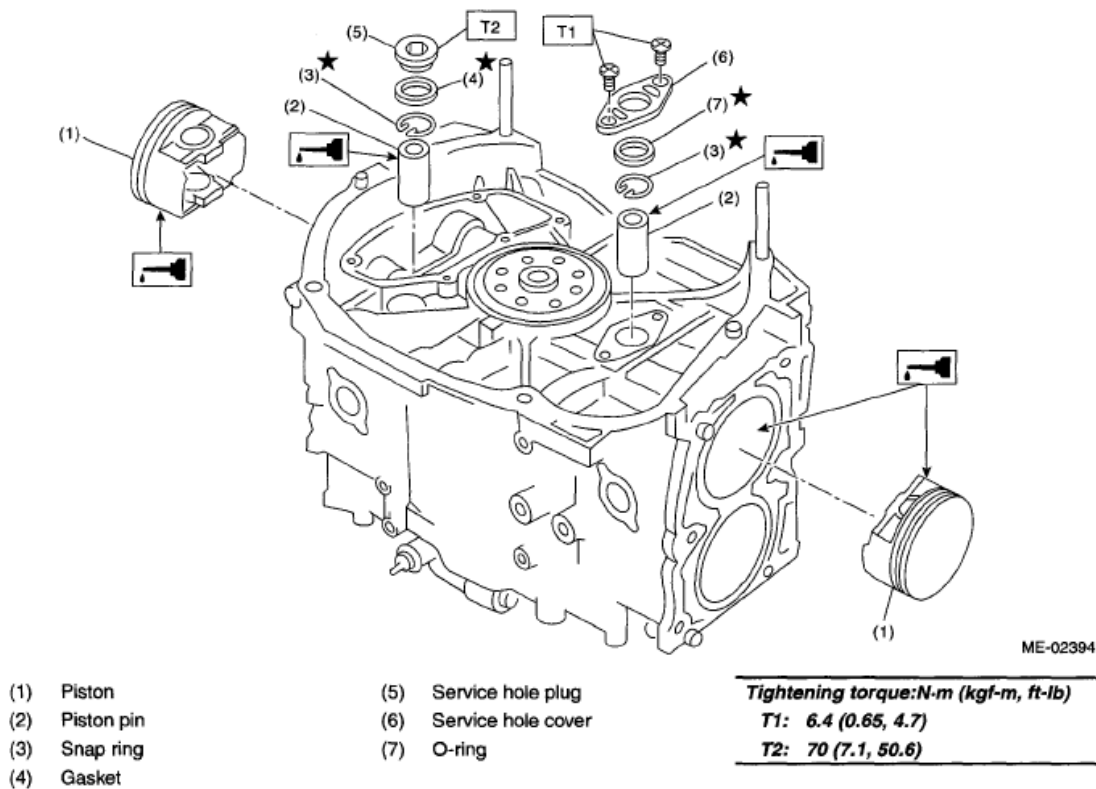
Identifying Piston, Piston Pin, Service Hole Plug And Cover, Gasket And Snap Ring With Torque Specifications
